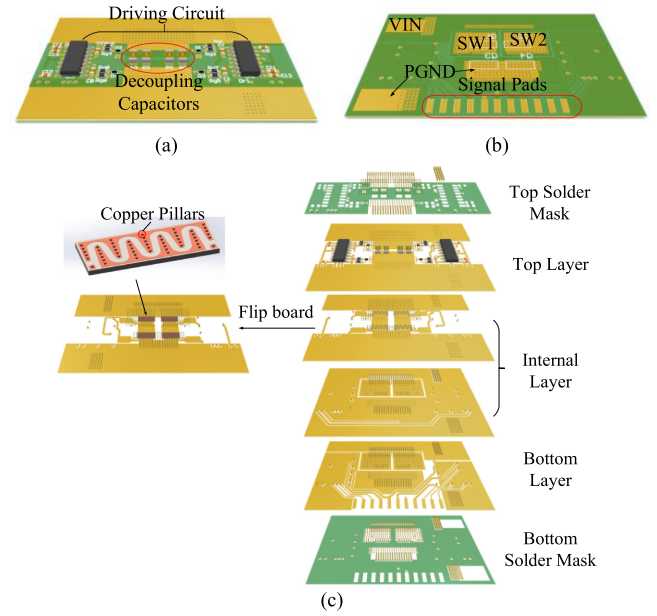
Detailed structure schematic of the proposed face-up PEGM (a) top view, (b) bottom view, and (c) exploded view.
